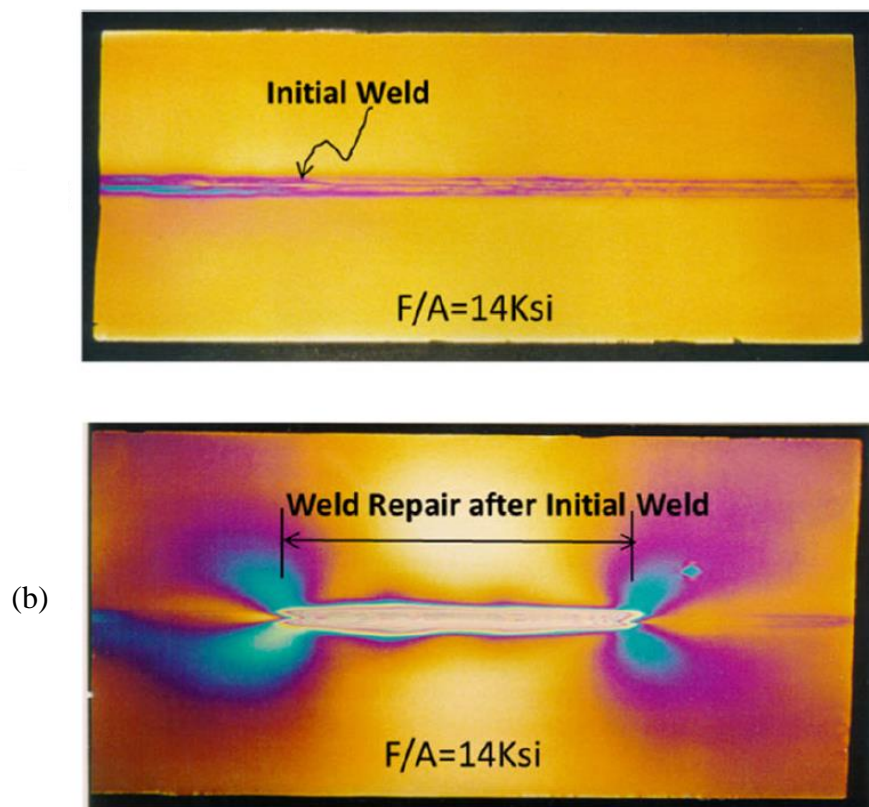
Residual stress fields of (a) initial fabrication weld and (b) a short length weld repair with same external loading [64]
